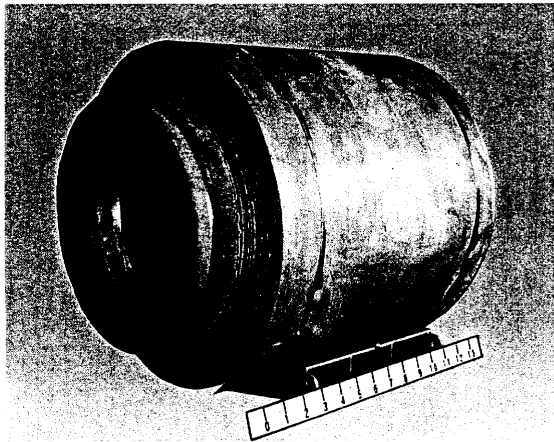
Ten-ton coil of 1 330 mm wide cast strip
